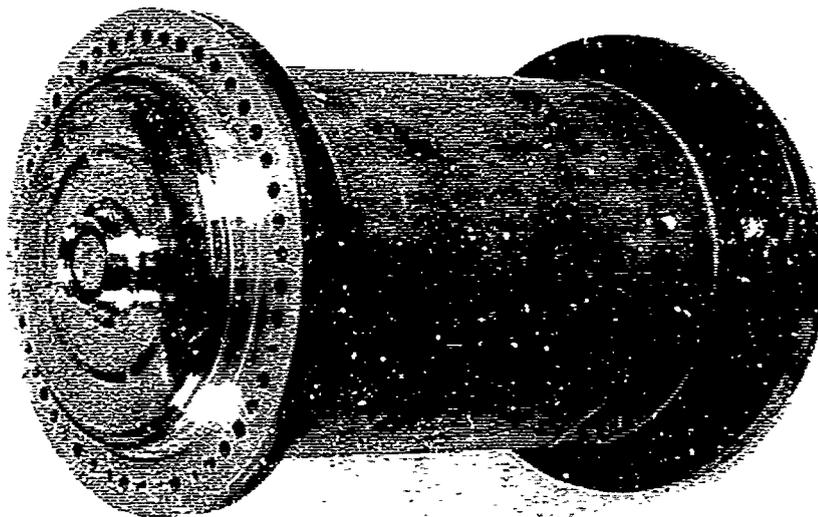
Rolling Diaphragm Assembly After Test 10 (Liquid Bulkhead End)
